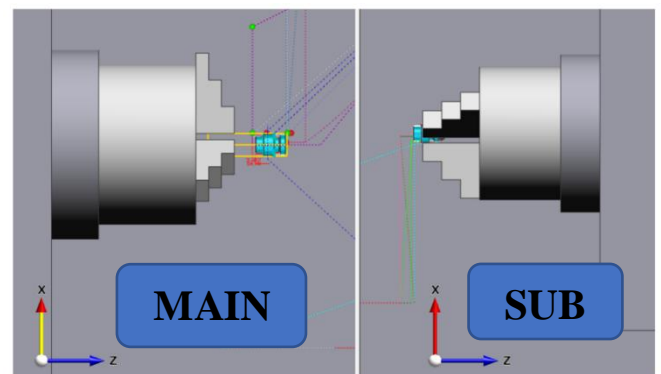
Machining space - view of the main spindle "MAIN" and the auxiliary spindle "SUB" of MAZAK HQR 150 MSY
